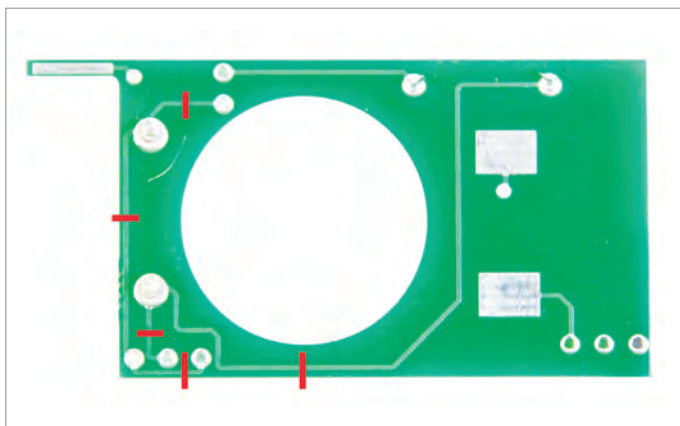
Cut the circuit traces on the universal board; solder the batteries
